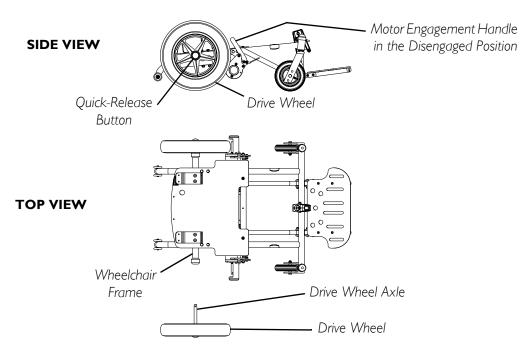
REMOVING/INSTALLING THE DRIVE WHEELS
